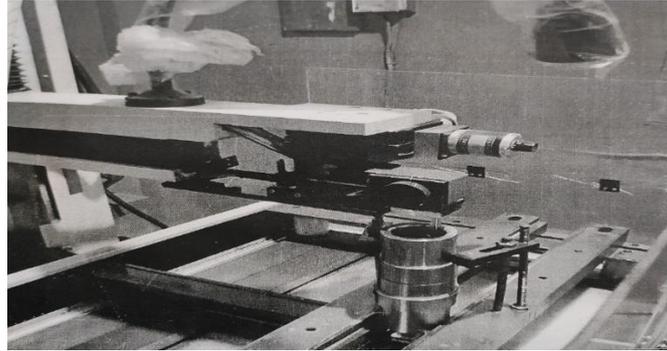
wire cut EDM for ID QA in Hollow shaft.
